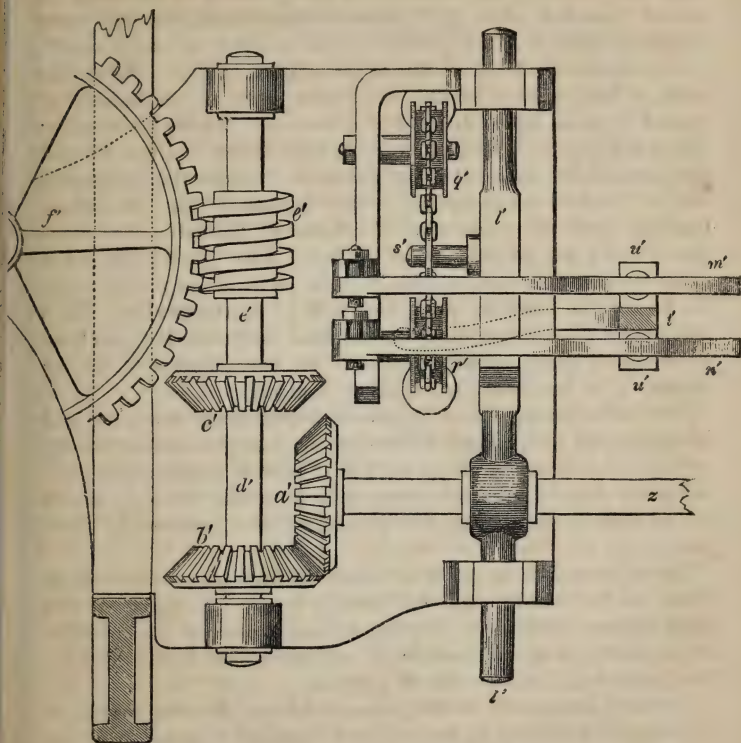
Tube-Roving Frame. Details of the Traverse Motion, shown in plan.
